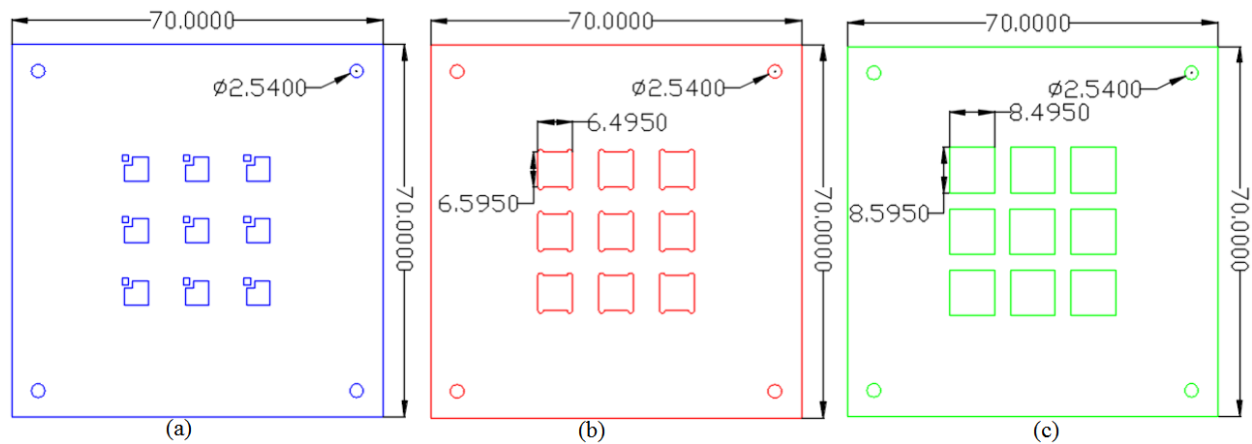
AutoCAD design (a) Kapton mask, (b) aluminum bottom frame, (c) aluminum top frame for E-beam evaporation on Si-IGBT
